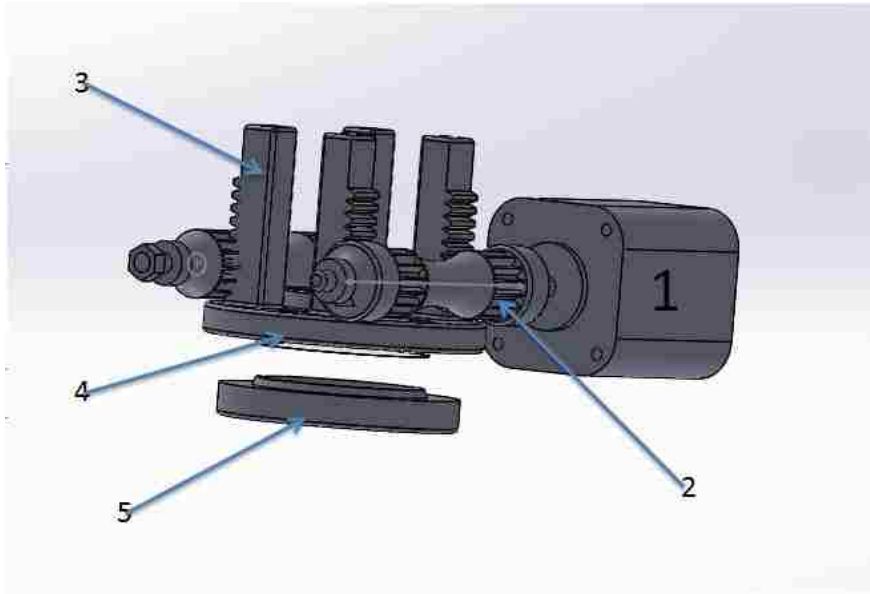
Part view of one motor design: 1.step motor; 2.gear; 3.gear racks part; 4.transparent membrane; 5.Membrane anchor plate
